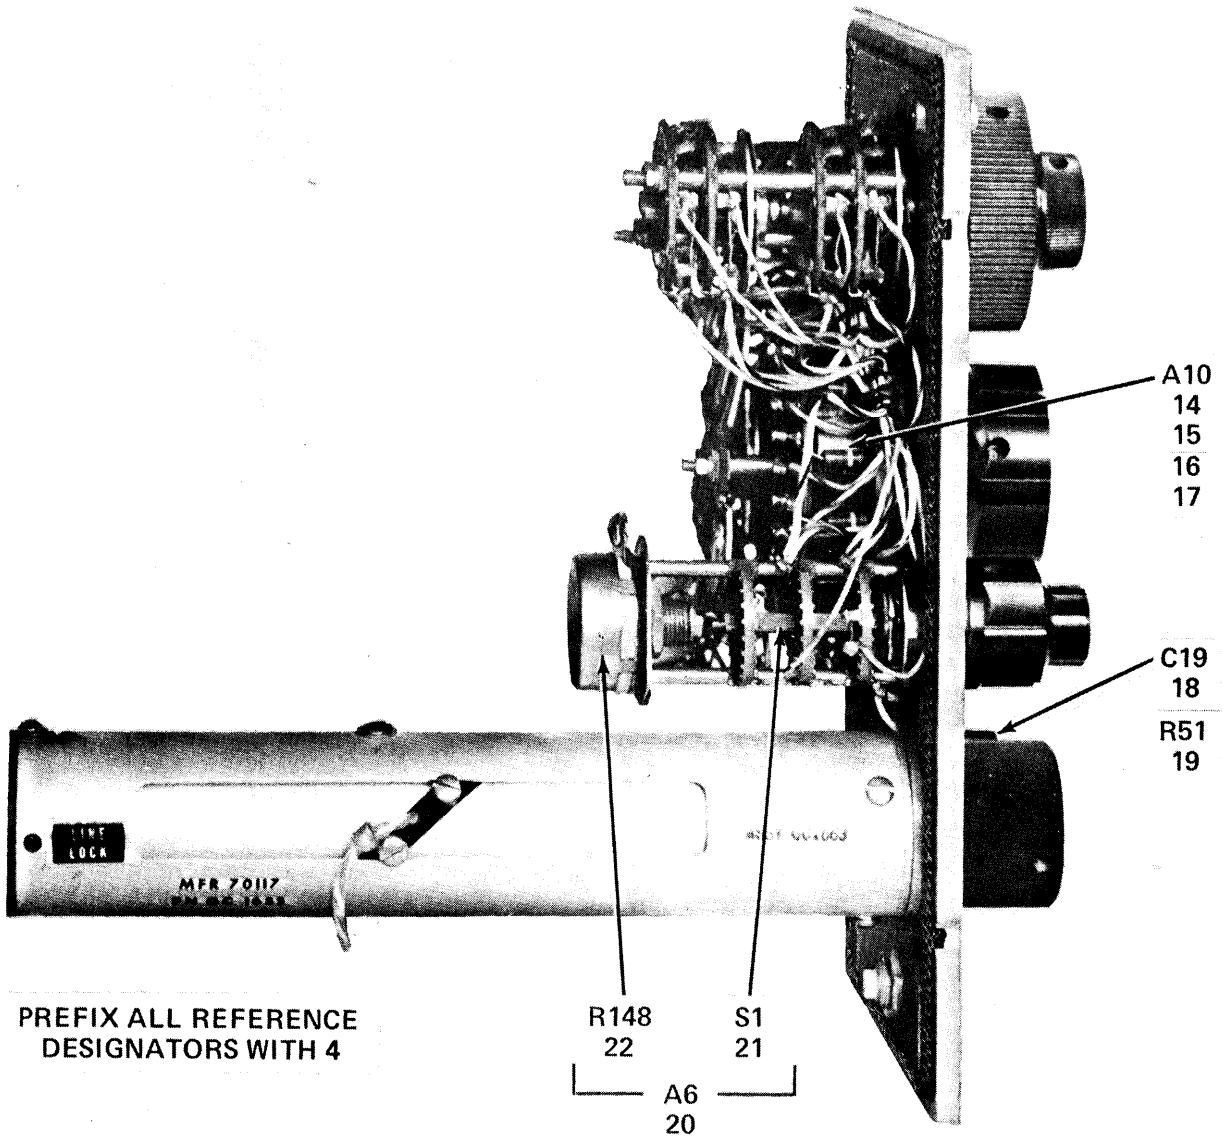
① Panel assembly, unit 4 (sheet 1 of 2).
